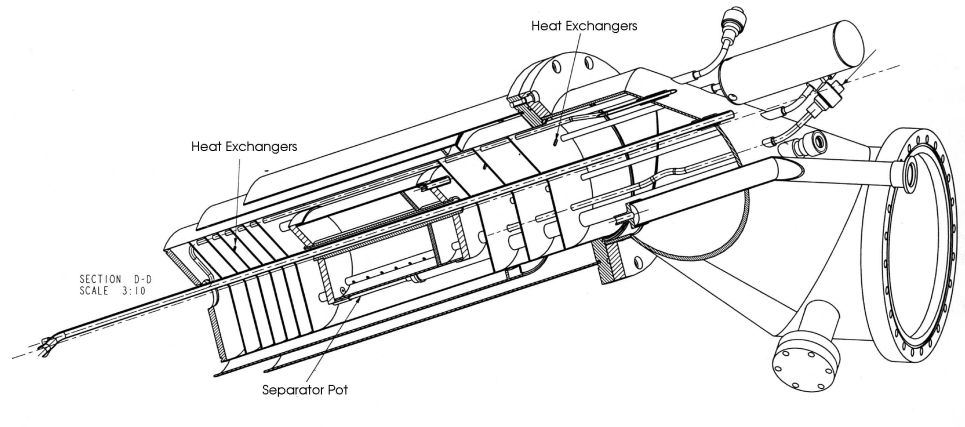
Drawing of the ^4He evaporation refrigerator [38].
